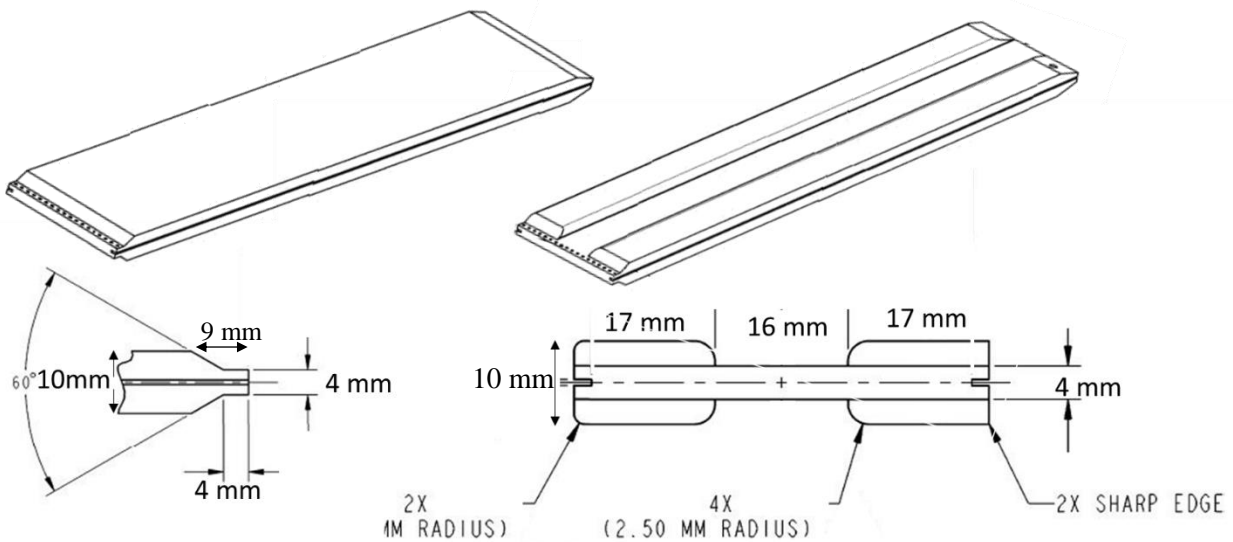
Details of the plain flat slab sample 9 (left) and grooved sample 8 (right). The lower left schematics show the ignition end detail, and the lower right schematic shows the cross section of the grooved sample 8.
